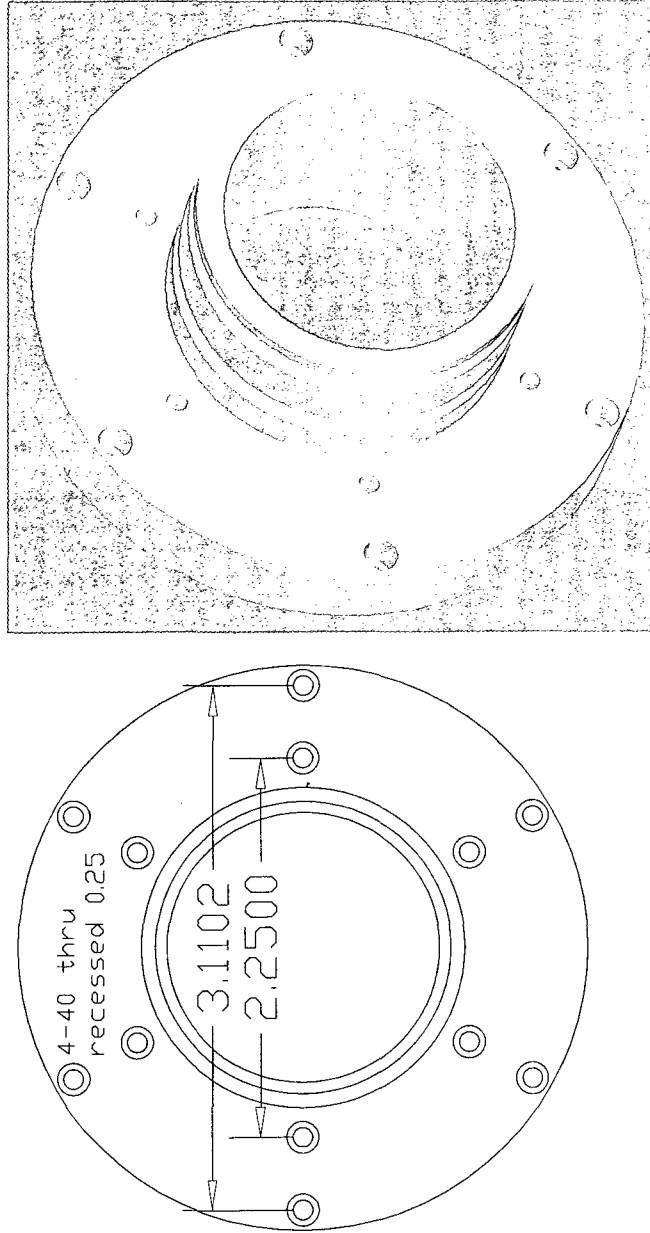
The first part of the skimmer holder mounts to the inside wall of the skimmer flange mount on the back of chamber 1. This part supports a rigid tube that attaches to the second part of the skimmer holder. The length of the tube determines the distance between the source and the skimmer.
